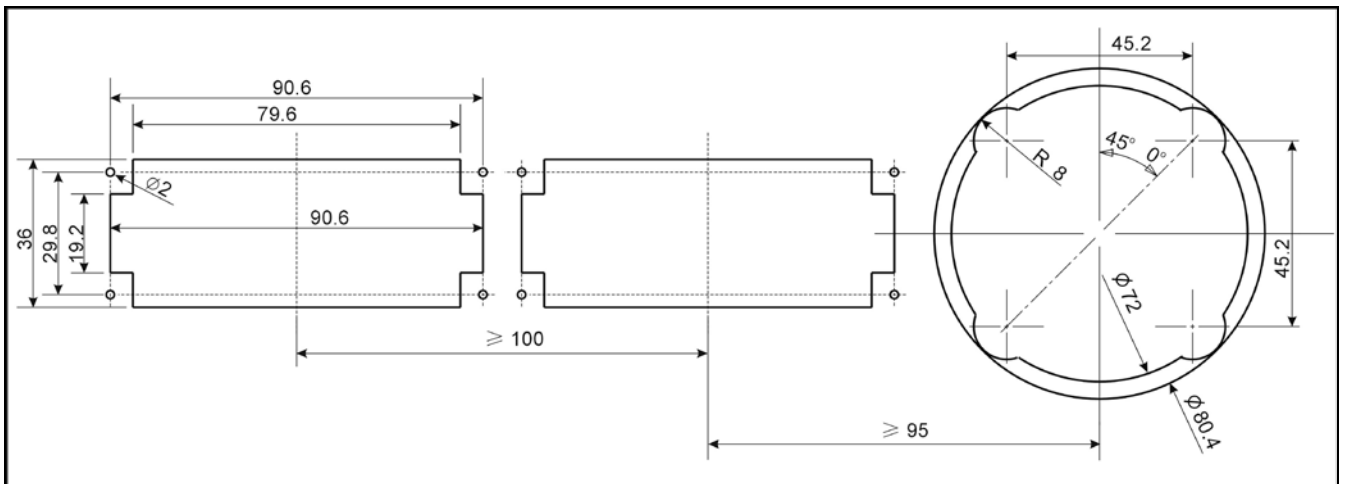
Positioning and assembly installation diagram of several HCS-48U6 series congress units (unit: mm)
